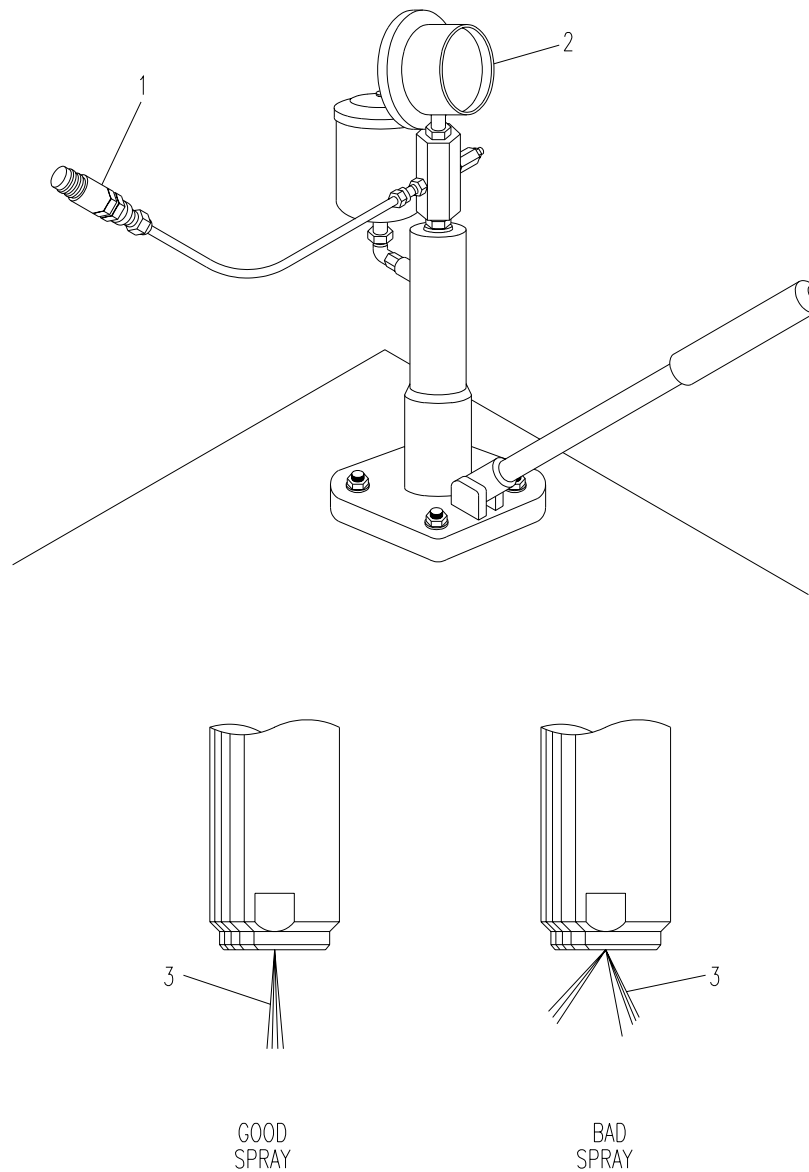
Injection Nozzles (Sheet 1 of 2)
